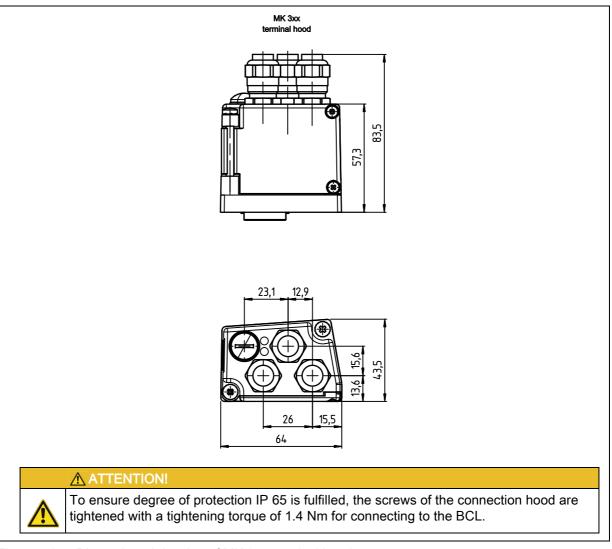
Dimensioned drawing of MK 3xx terminal hood
